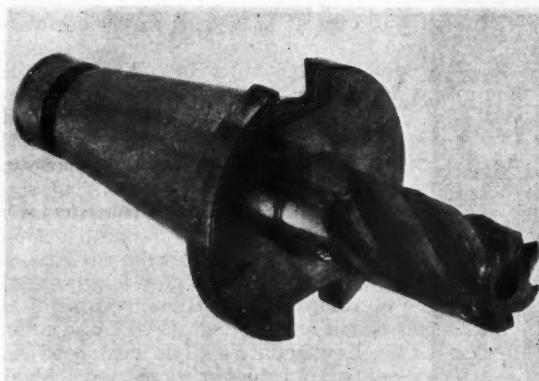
Six-bladed 1½ in. dia. r.h. helix carbide cutter
